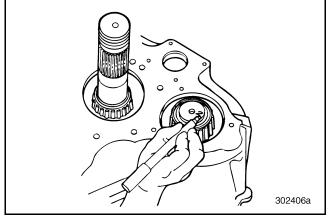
Marking Rear Countershafts (T313L21/T318L21 Shown)
